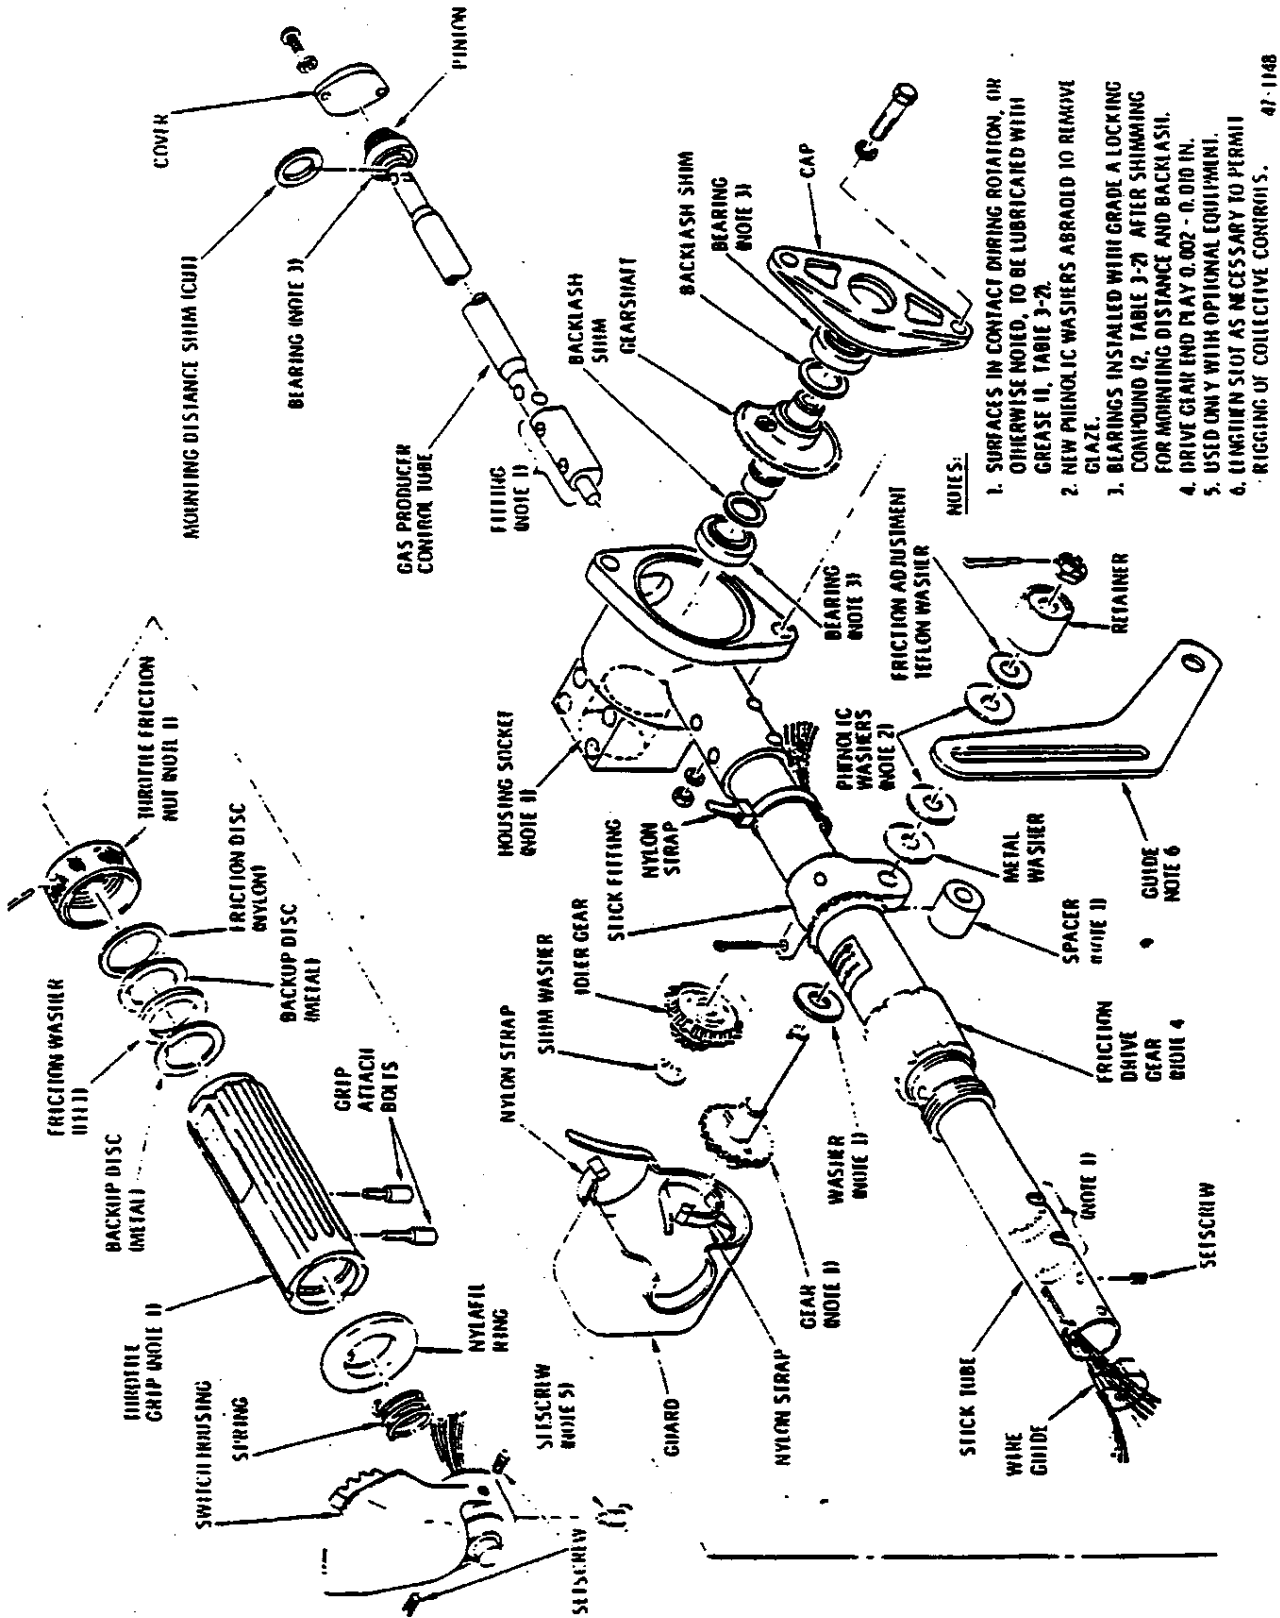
Pilot's Collective Pitch Stick - Exploded View
